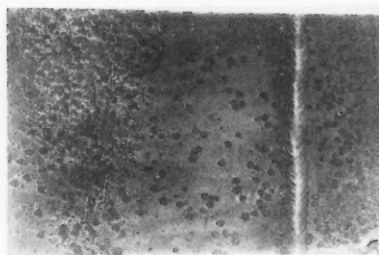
Pitting of Type 310 stainless steel plate lining in a secondary preheater exchanger's hot outlet header, exposed to feed gas.
